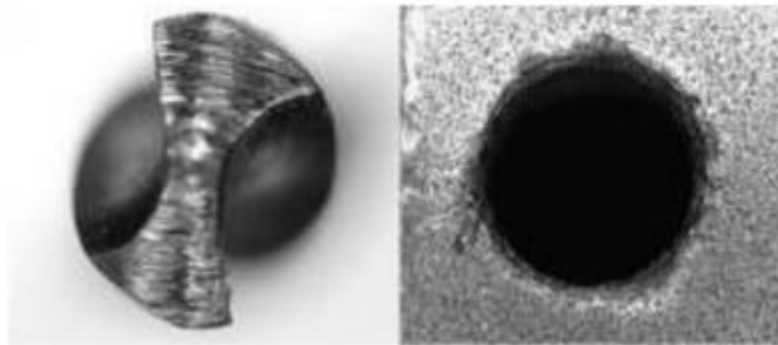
The top view of the drill bit of ANDRILL HSS twist drill and hole after 16 through-holes without lubrication [15].
